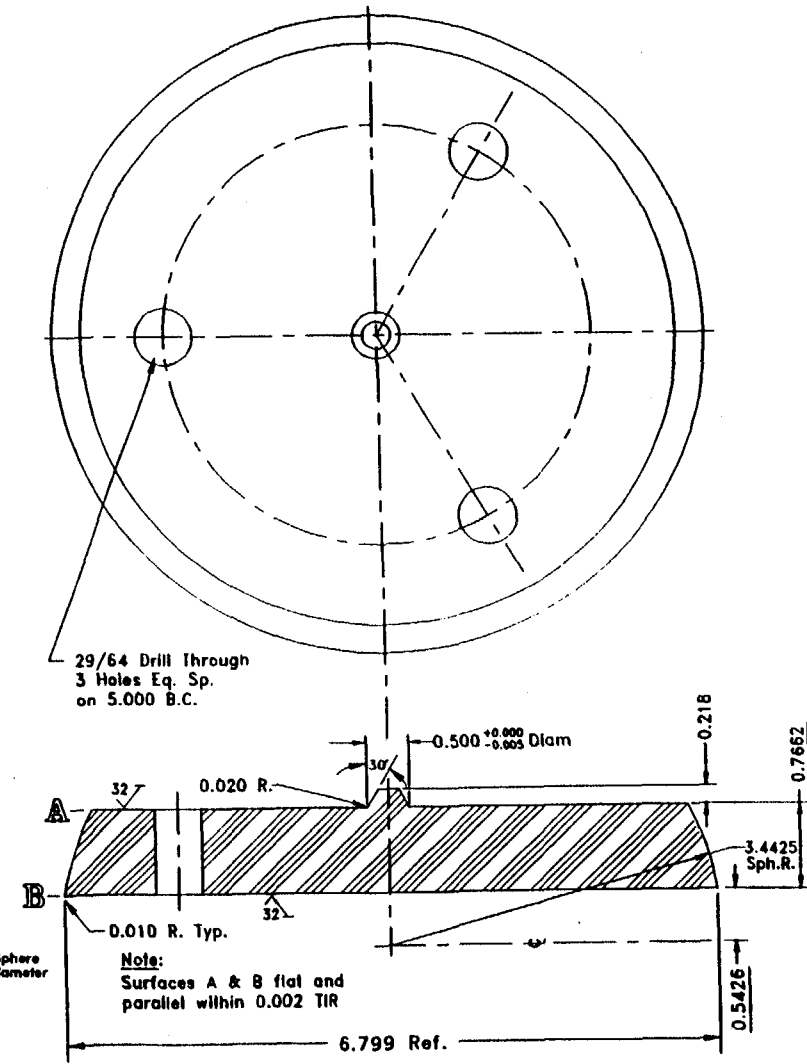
Upper plate—nominal radius, 3.4425 in.; material, oralloy.
